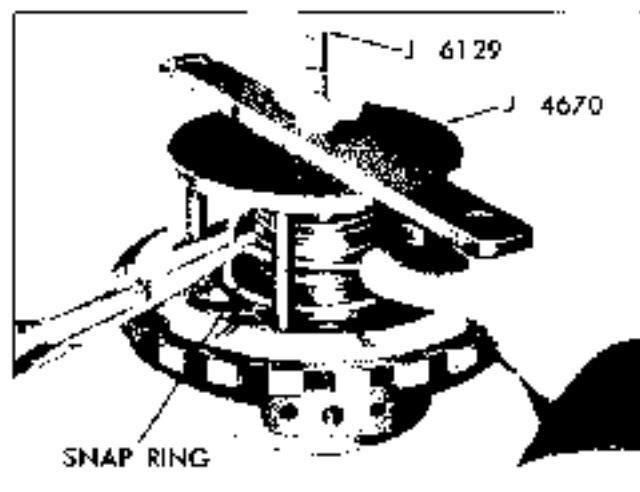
E-108 Removing Intermediate Clutch Piston Snap Ring
